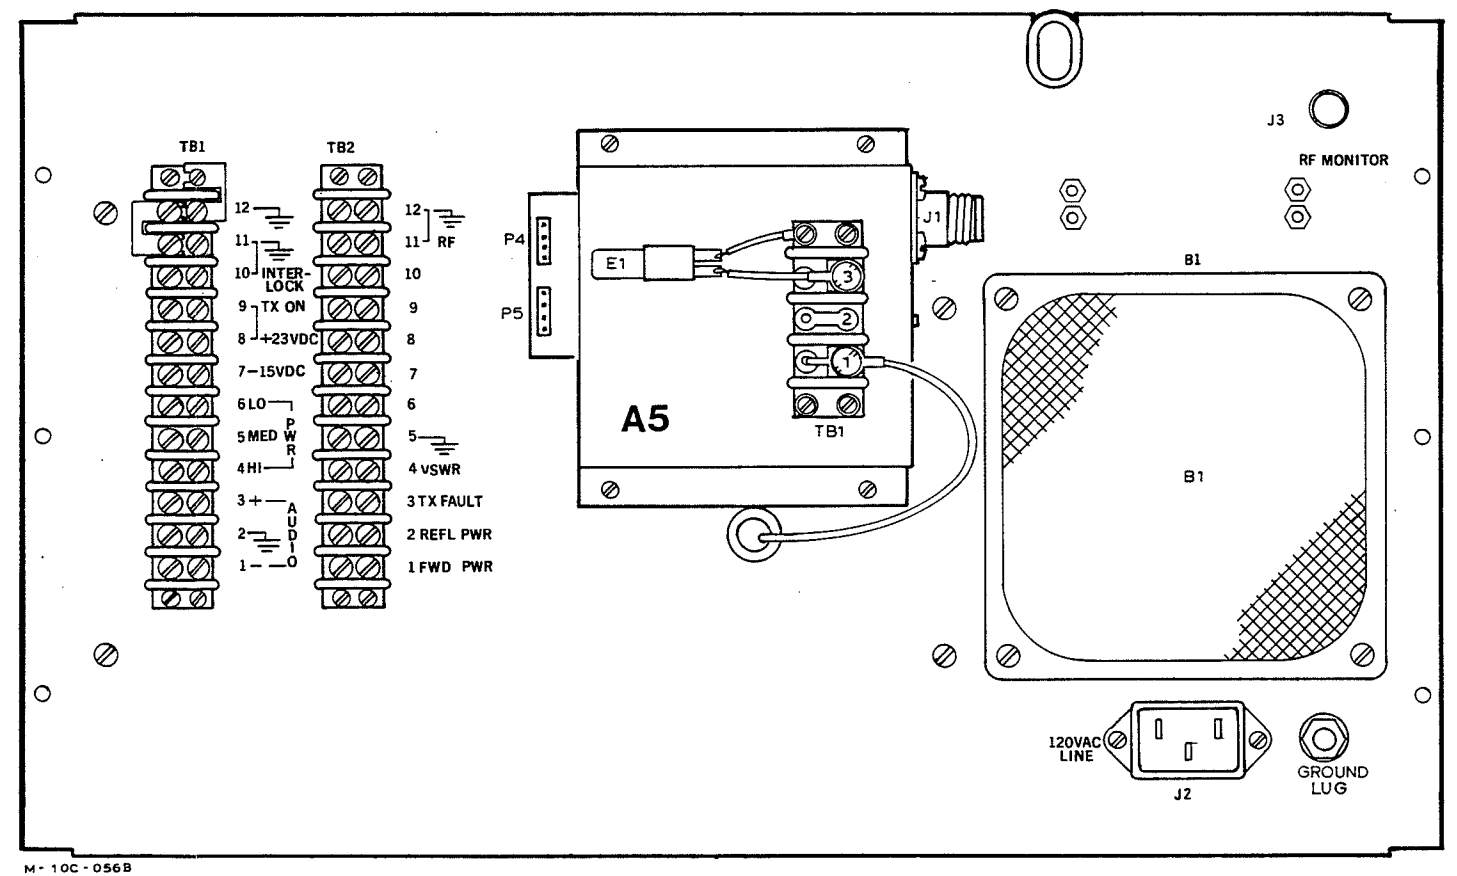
Assembly Detail - AMPFET P400 (Stereo) Transmitter (Rear View)
